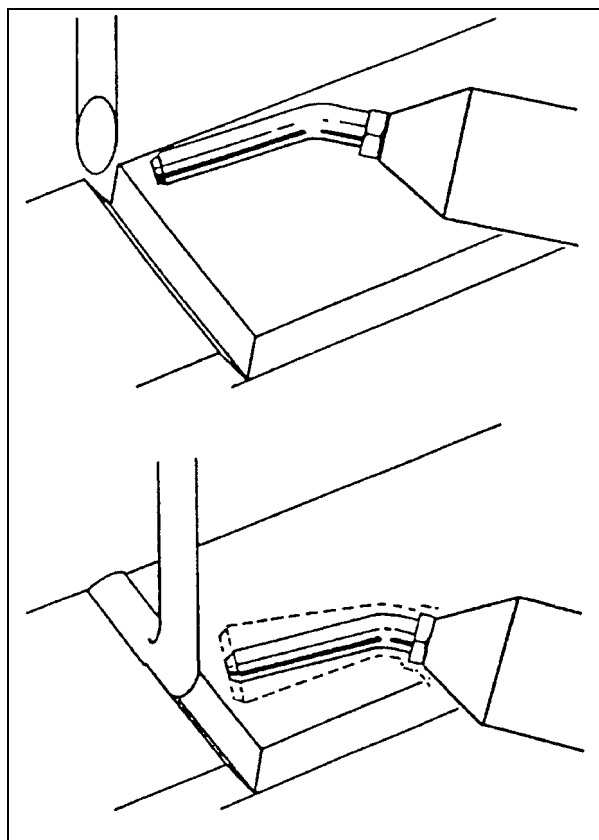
Manual hot gas welding. A heated gas flowing through the welding tip is applied to the joint interface and to the filler rod positioned at the joint. As the operator moves the tip and the filler rod along the joint, the filler rod and joint surfaces soften and fuse.
